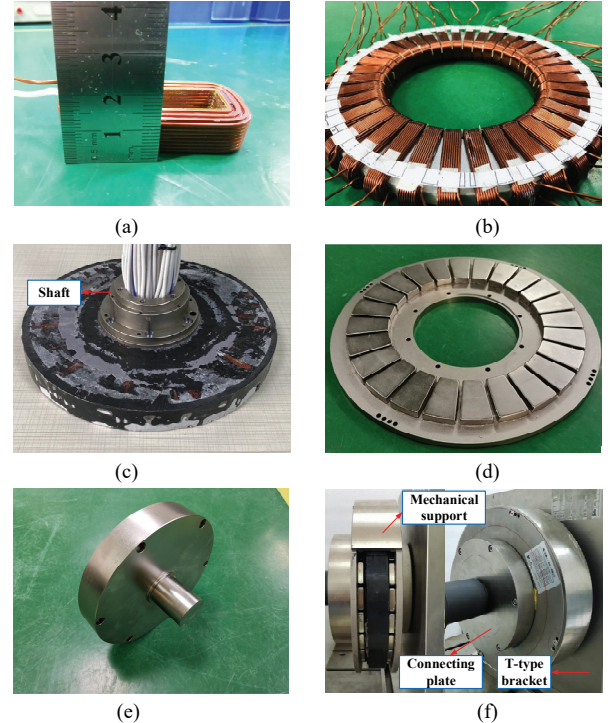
Prototype of the AFPM motor with ED-TW. (a) Toroidal winding. (b) Stator. (c) Stator encapsulation. (d) Rotor. (e) Connecting plate. (f) Motor assembly.
